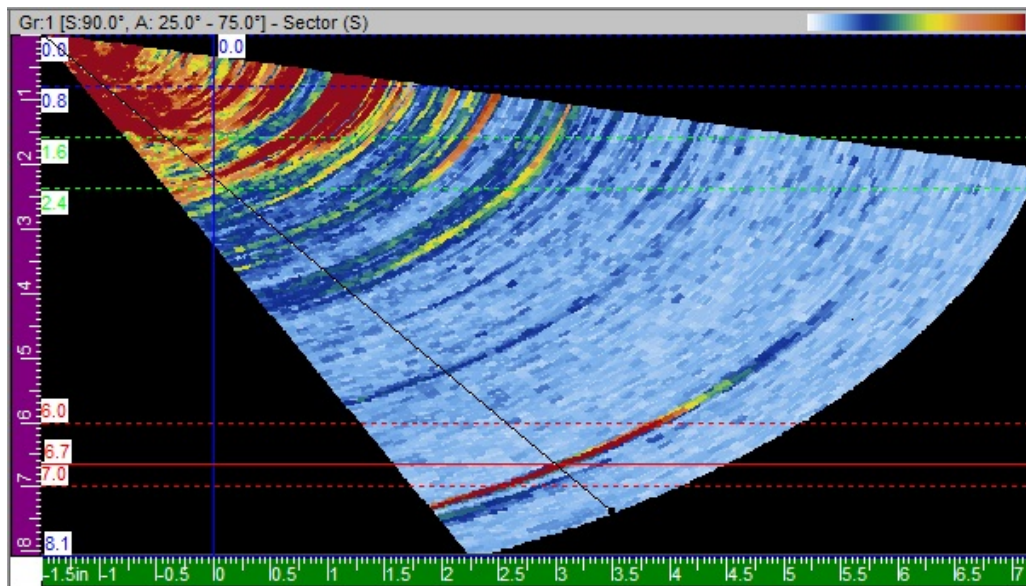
File0005 S-Scan of exterior side inspection for Hole 1 (Testing E.2).
